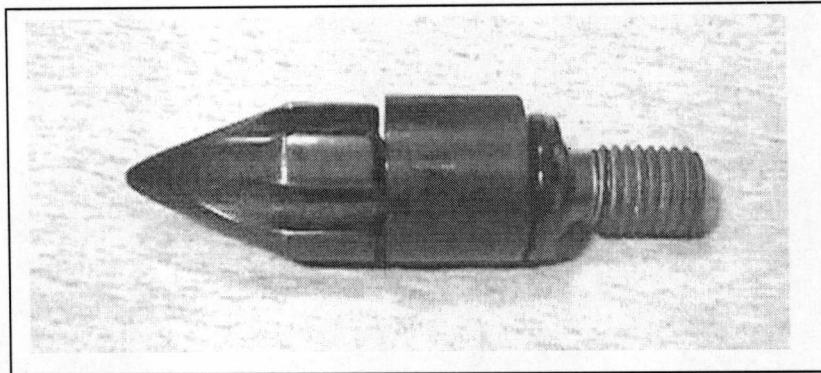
EMI Three-Piece Free-Flow Ring-Type Valve.
